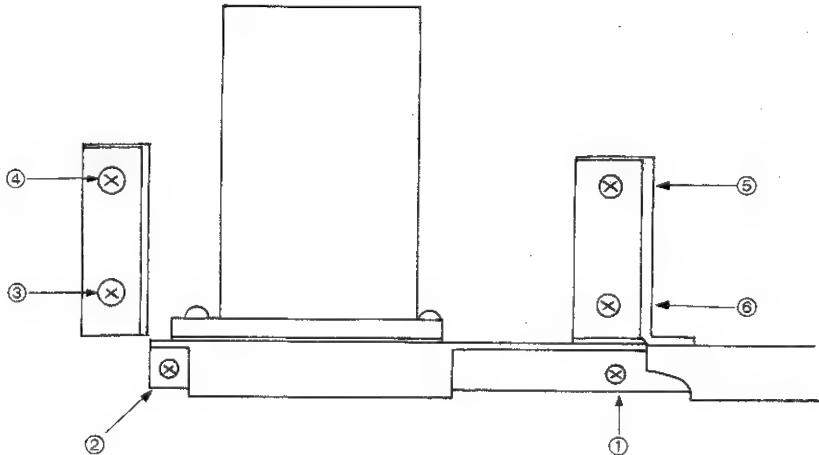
Rear View of Rotational Mechanism Unit (at Right Side)
